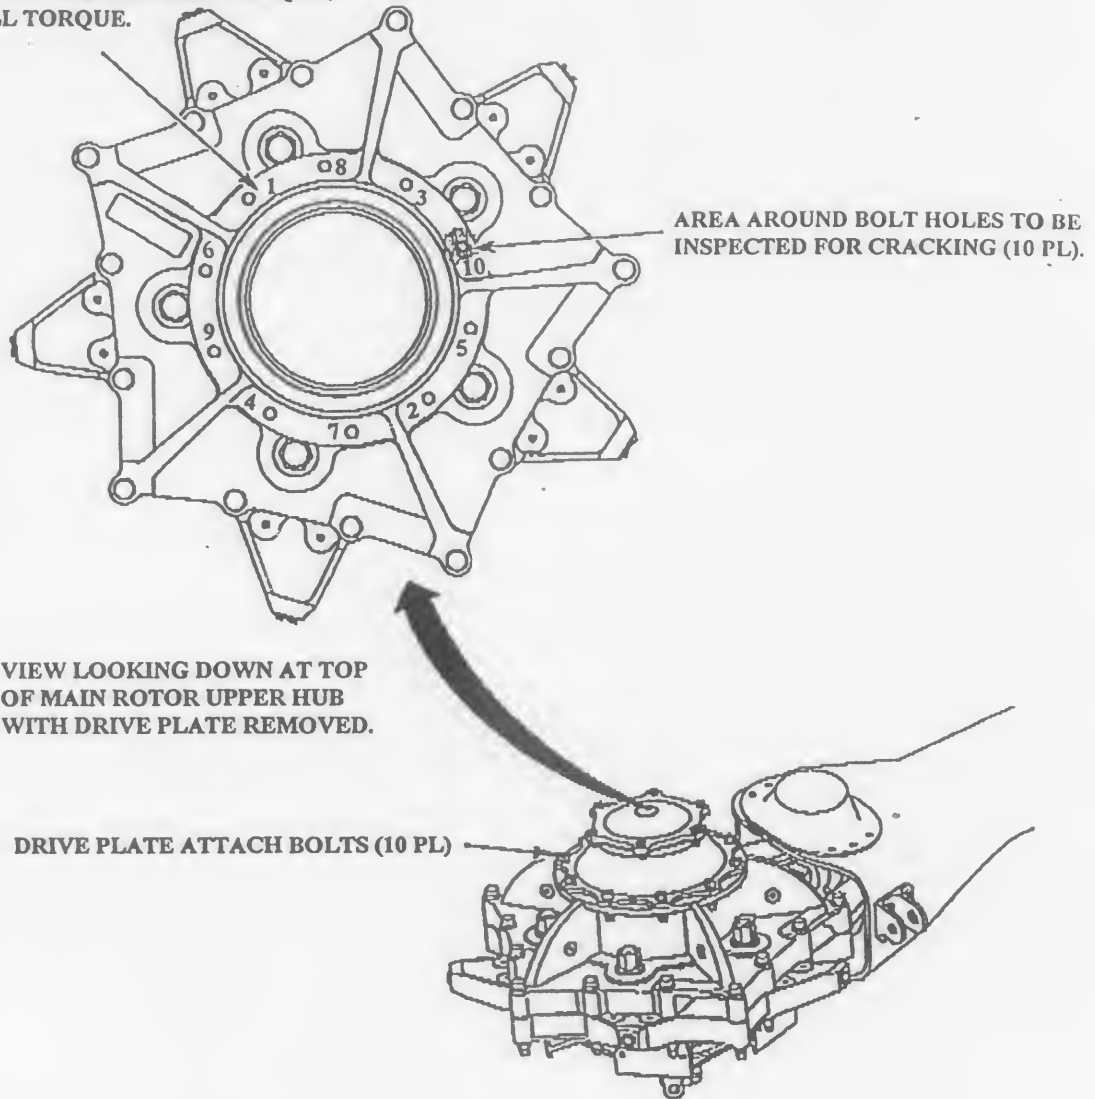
Main Rotor Upper Hub Assembly Inspection.
